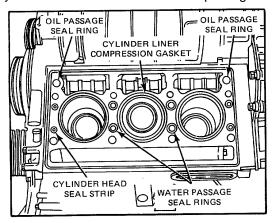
Cylinder Head Gaskets and Seals in Place on Cylinder Block
